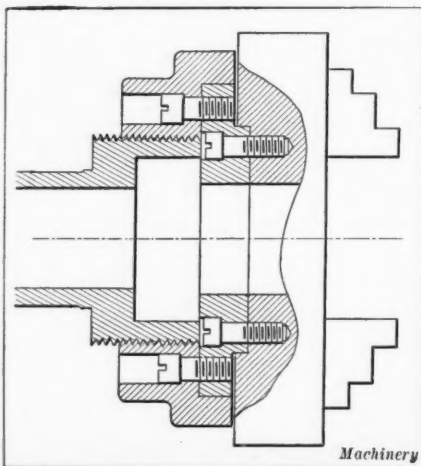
Small Chuck fitted to Lathe Spindle with Special Adapter
